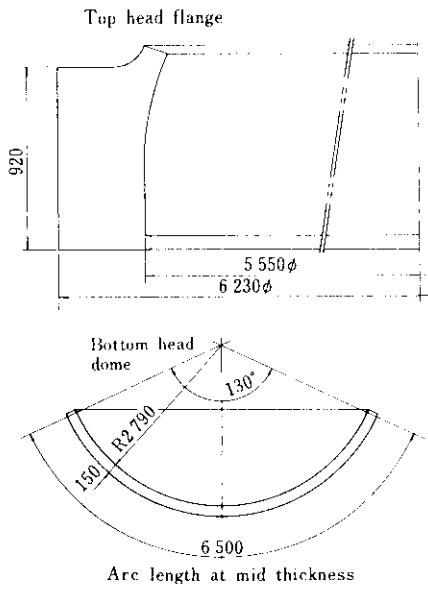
Dimension of trial forging for 800MWe class flange and dome
